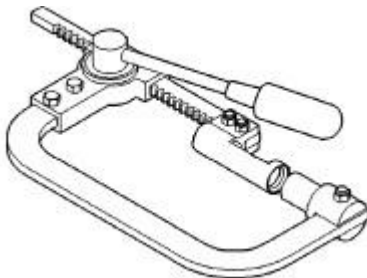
COMPRESSOR, VALVE SPRING - C-3422-D
